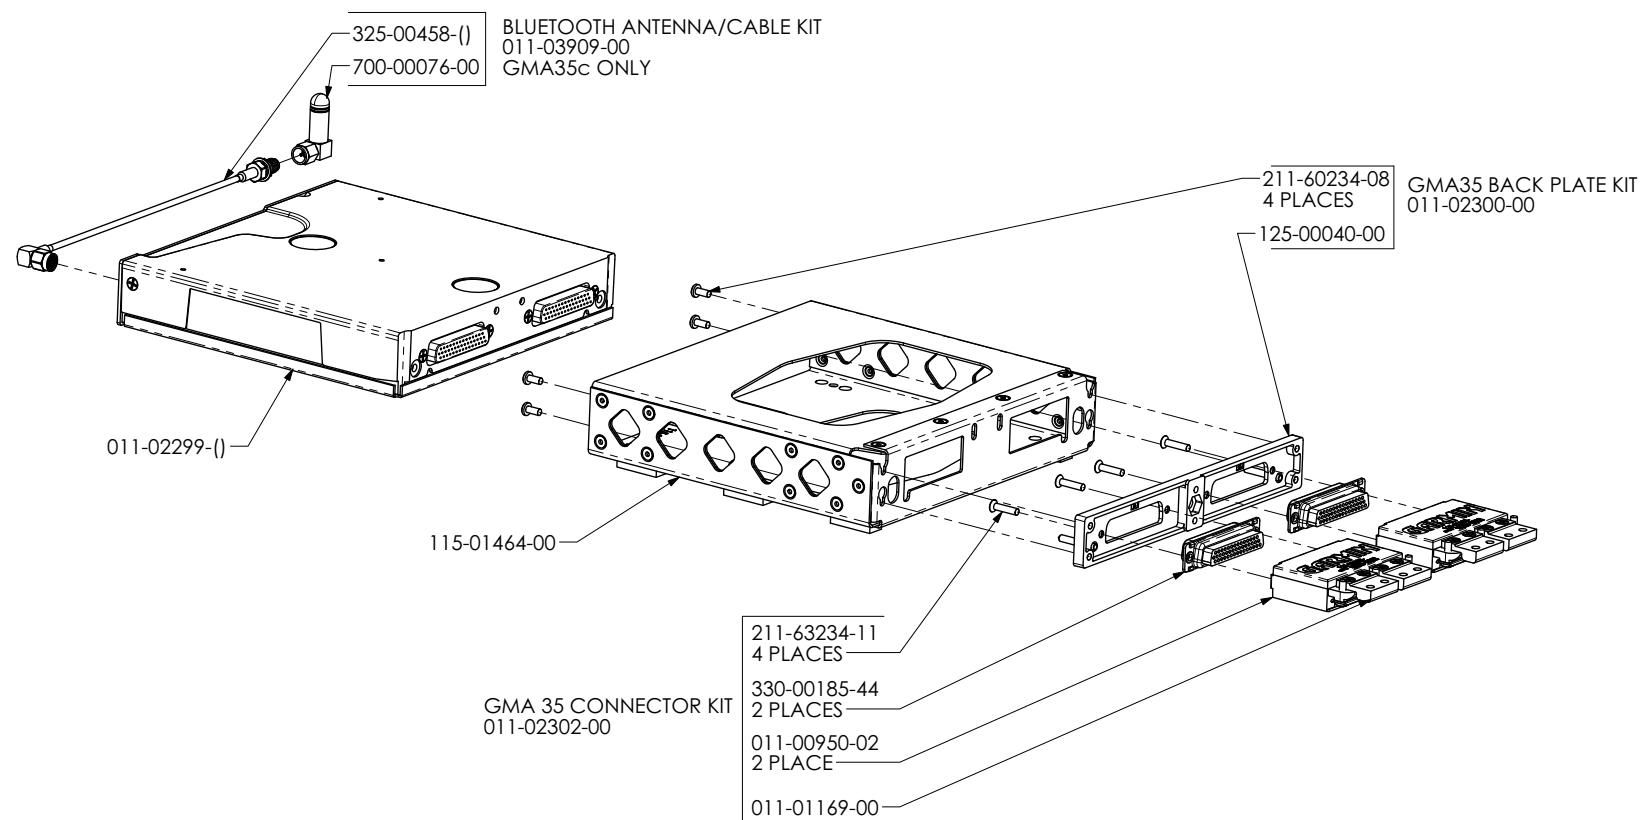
GMA 35c Mounting Rack Assembly Overview
